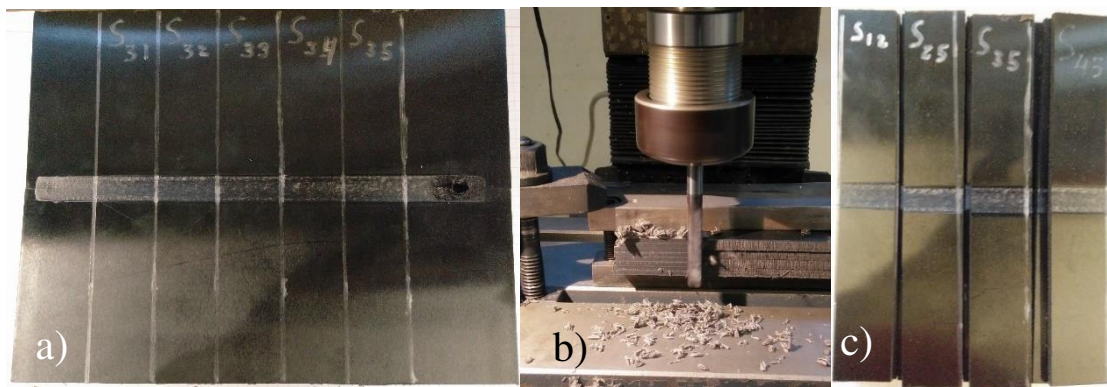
a) Plates with markings b) machining of the specimens and b) final specimens
